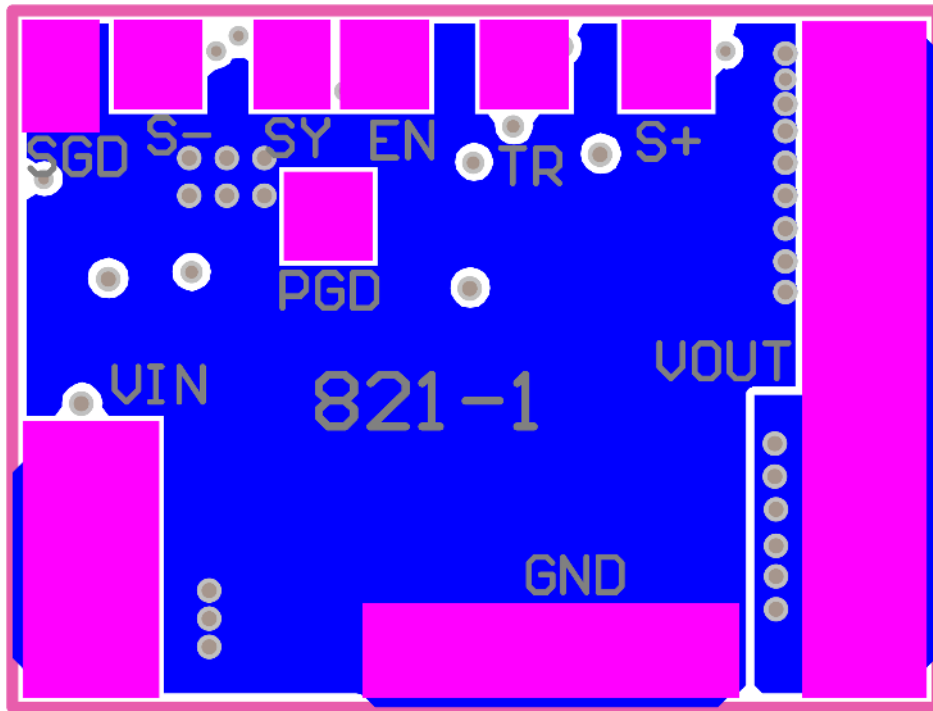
Bottom Copper and Paste Layers (Bottom view)
